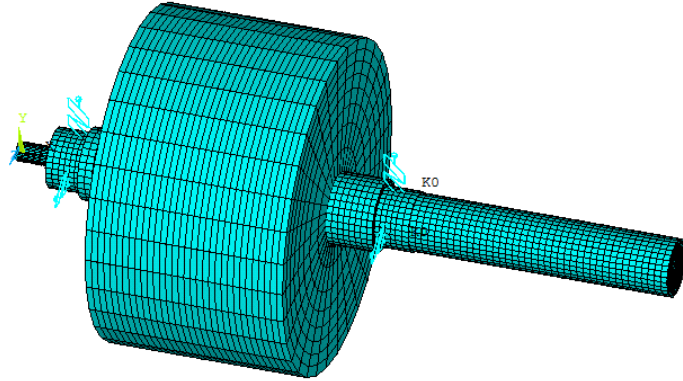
Rotor-bearing system for rotor-dynamics analysis.
